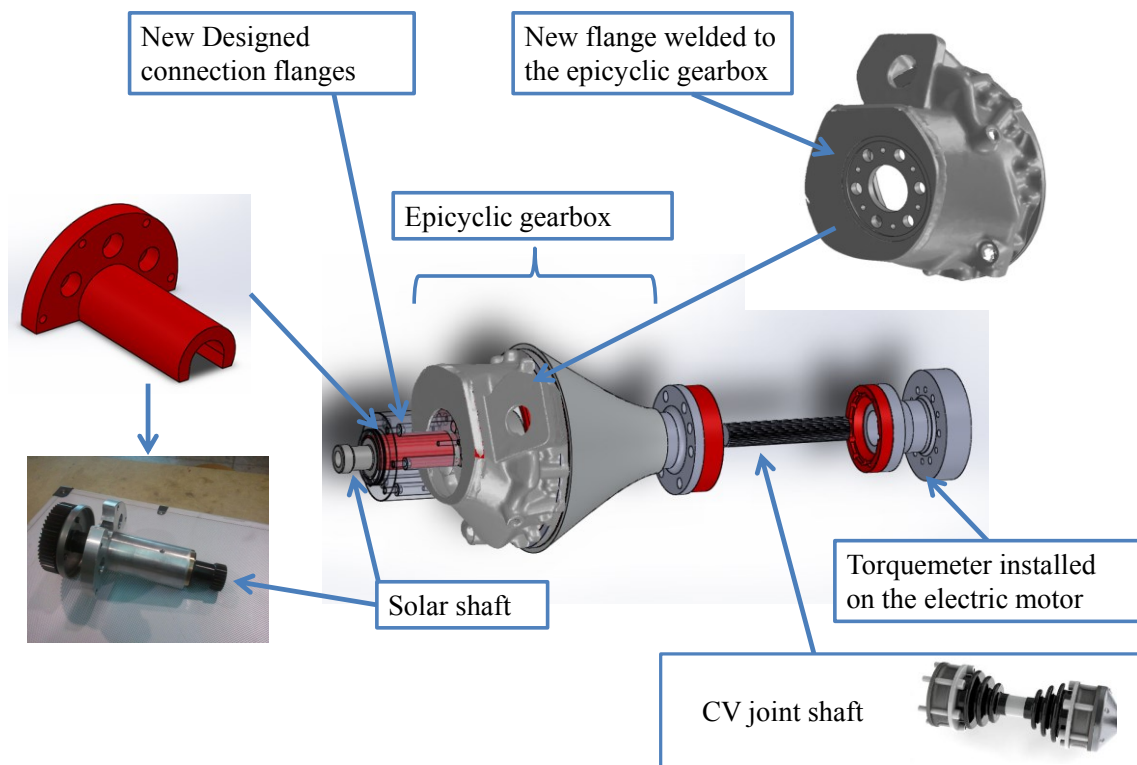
3D draw of the transmission line assembly with the new designed components
